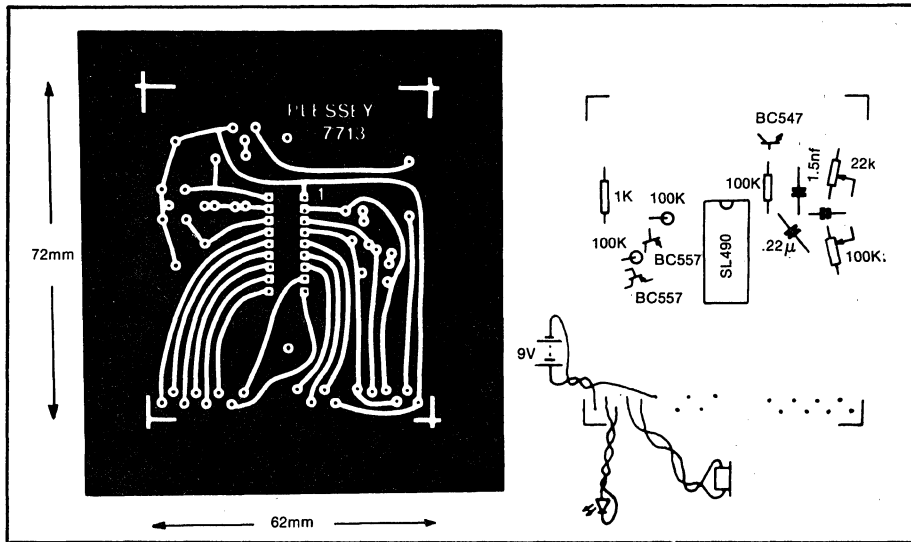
Ultrasonic Transmitter P.C.B. and Component Layout
